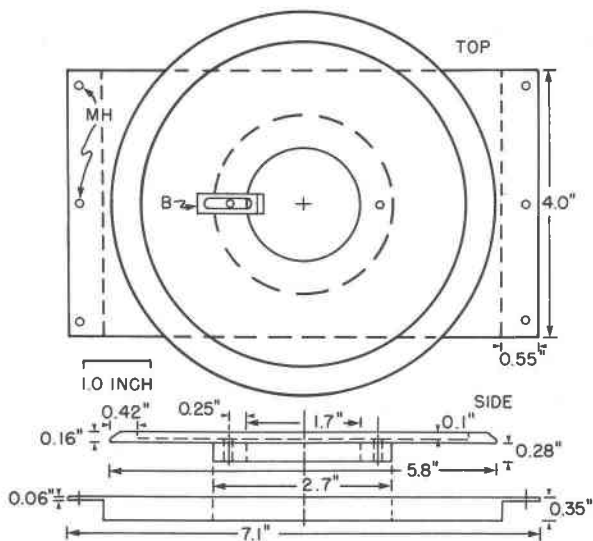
Diagram of top and side view of rotating stage. B-buttnress; MH-mounting holes (6 total). The rotating stage assembly mounts on to the existing moveable carriage. This design is for the Micron 750 reader.
